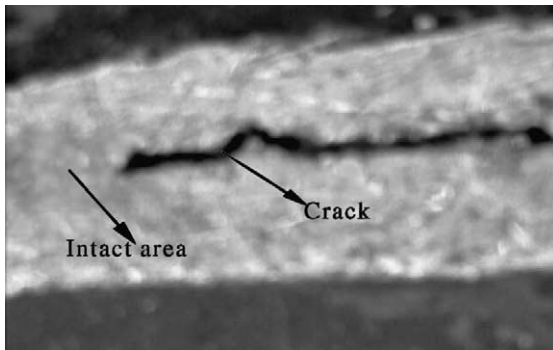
Crack in solder joints layer under fatigue shear loading.
